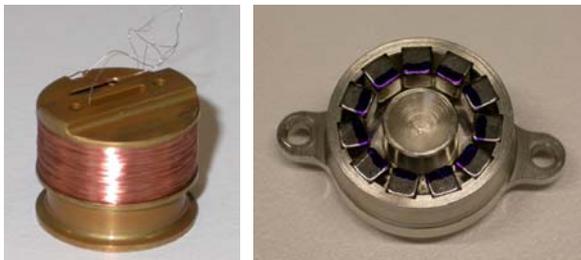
Parts of the custom made LCM voice coil actuator (Breadboard version)
